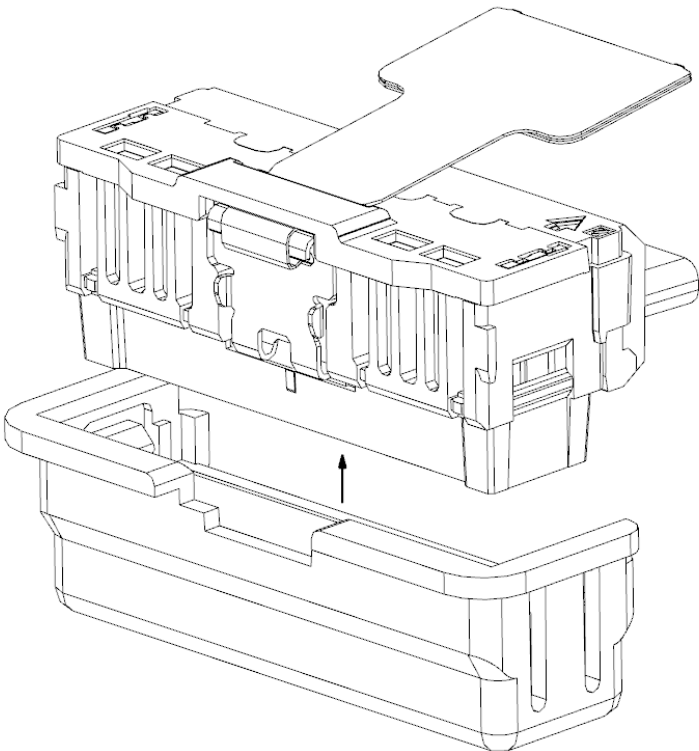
Free-Side Connector & Dust Cover Assembly Direction
